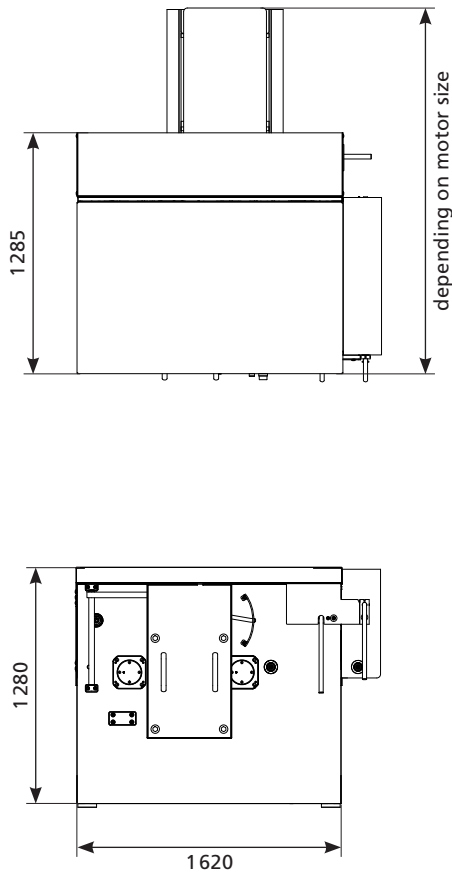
Dimensions (mm) of a KME3-812 with motor at the rear, right-hand design
